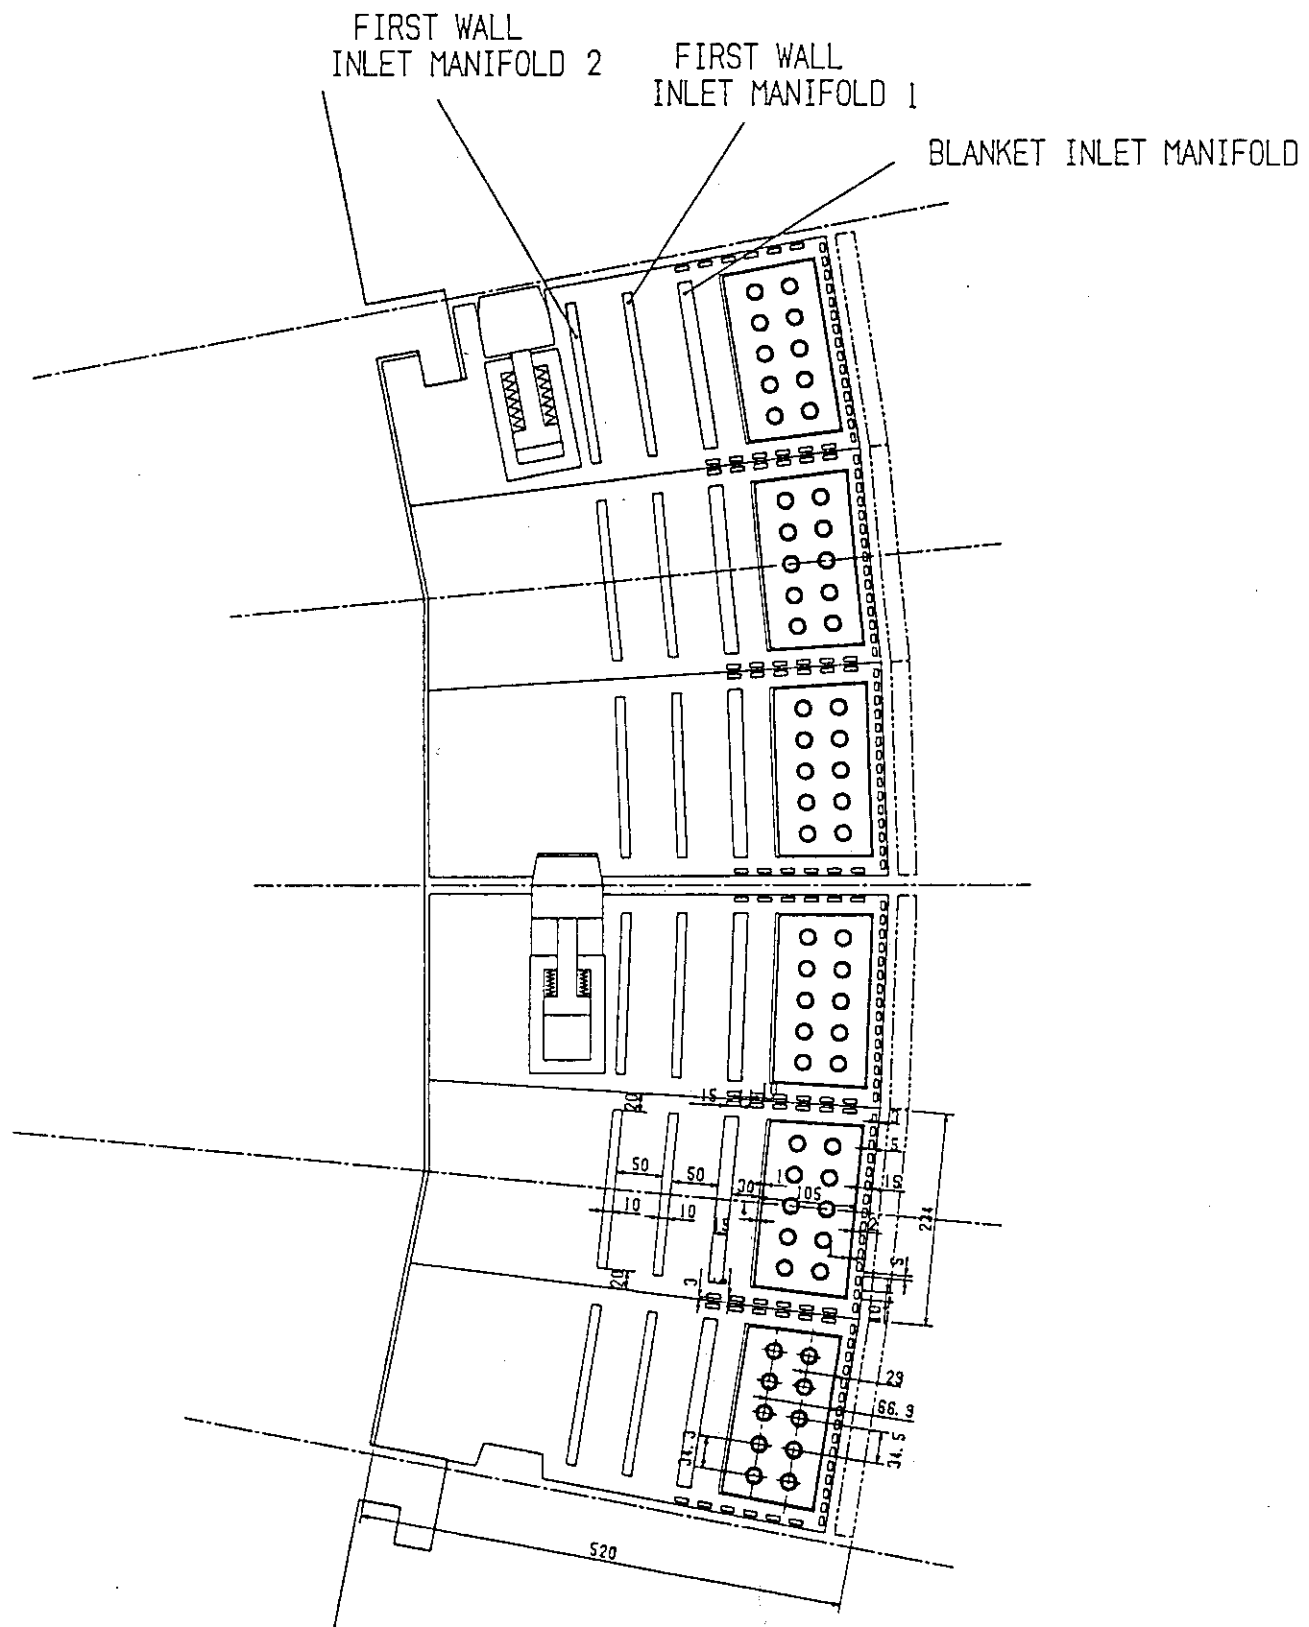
Cross-sectional view of inboard blanket at midplane
